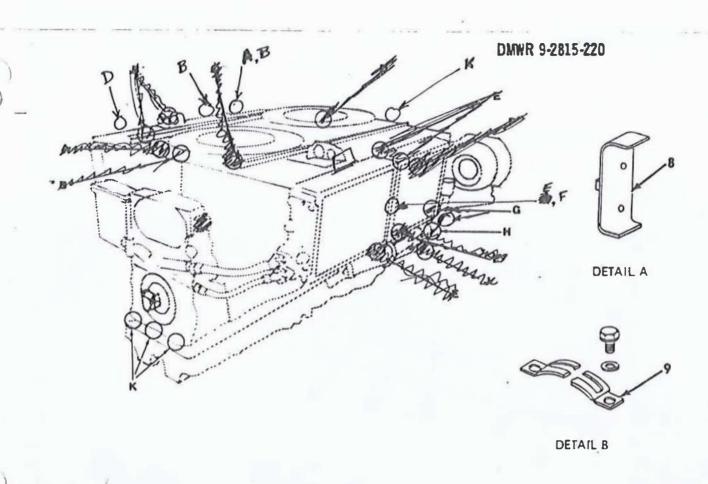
Engine wiring harness brackets and clamps (Sheet 1 of 3)
